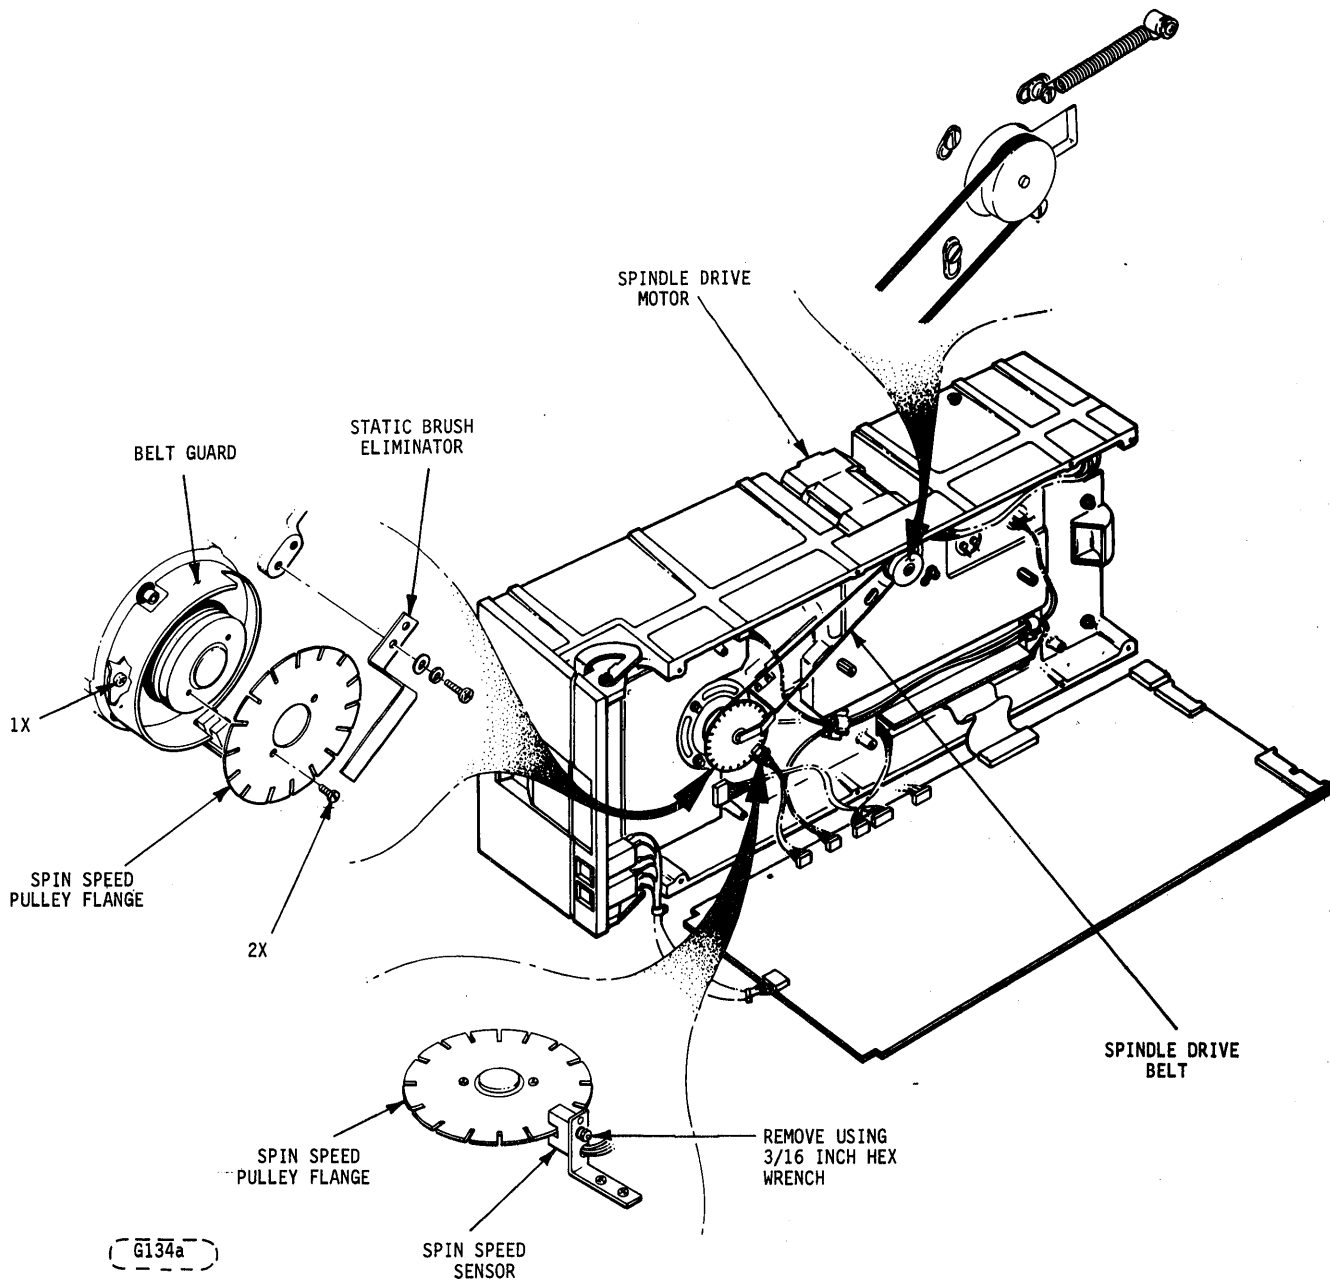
SUBASSEMBLY REMOVAL AND ADJUSTMENT
